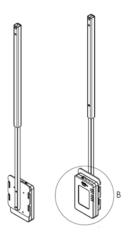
Swing-arm assembly drawing showing attachment to accommodate either a smartphone or a NI myRIO device
